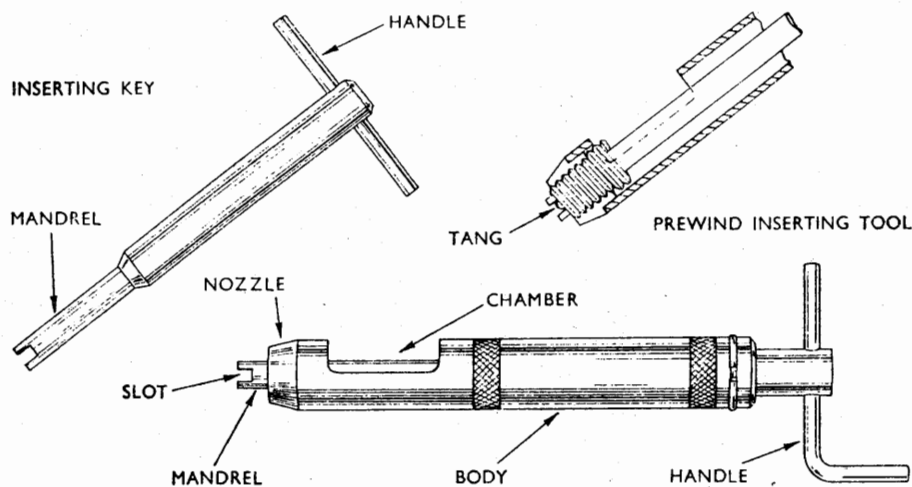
INSERTING KEY AND PREWIND INSERTING TOOL
